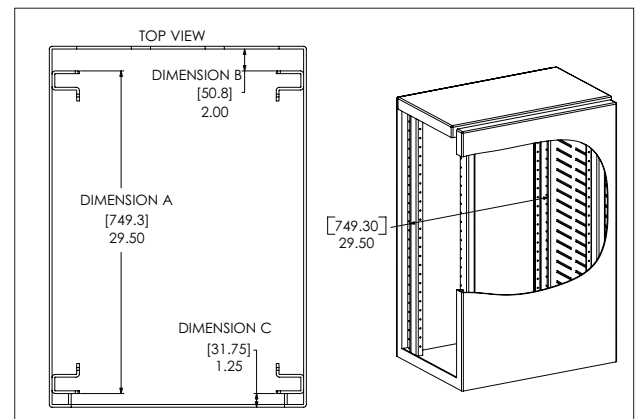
Figure A. If dimension C exceeds 1" use the Rack Extender Kit, Part # 310 113 406.
